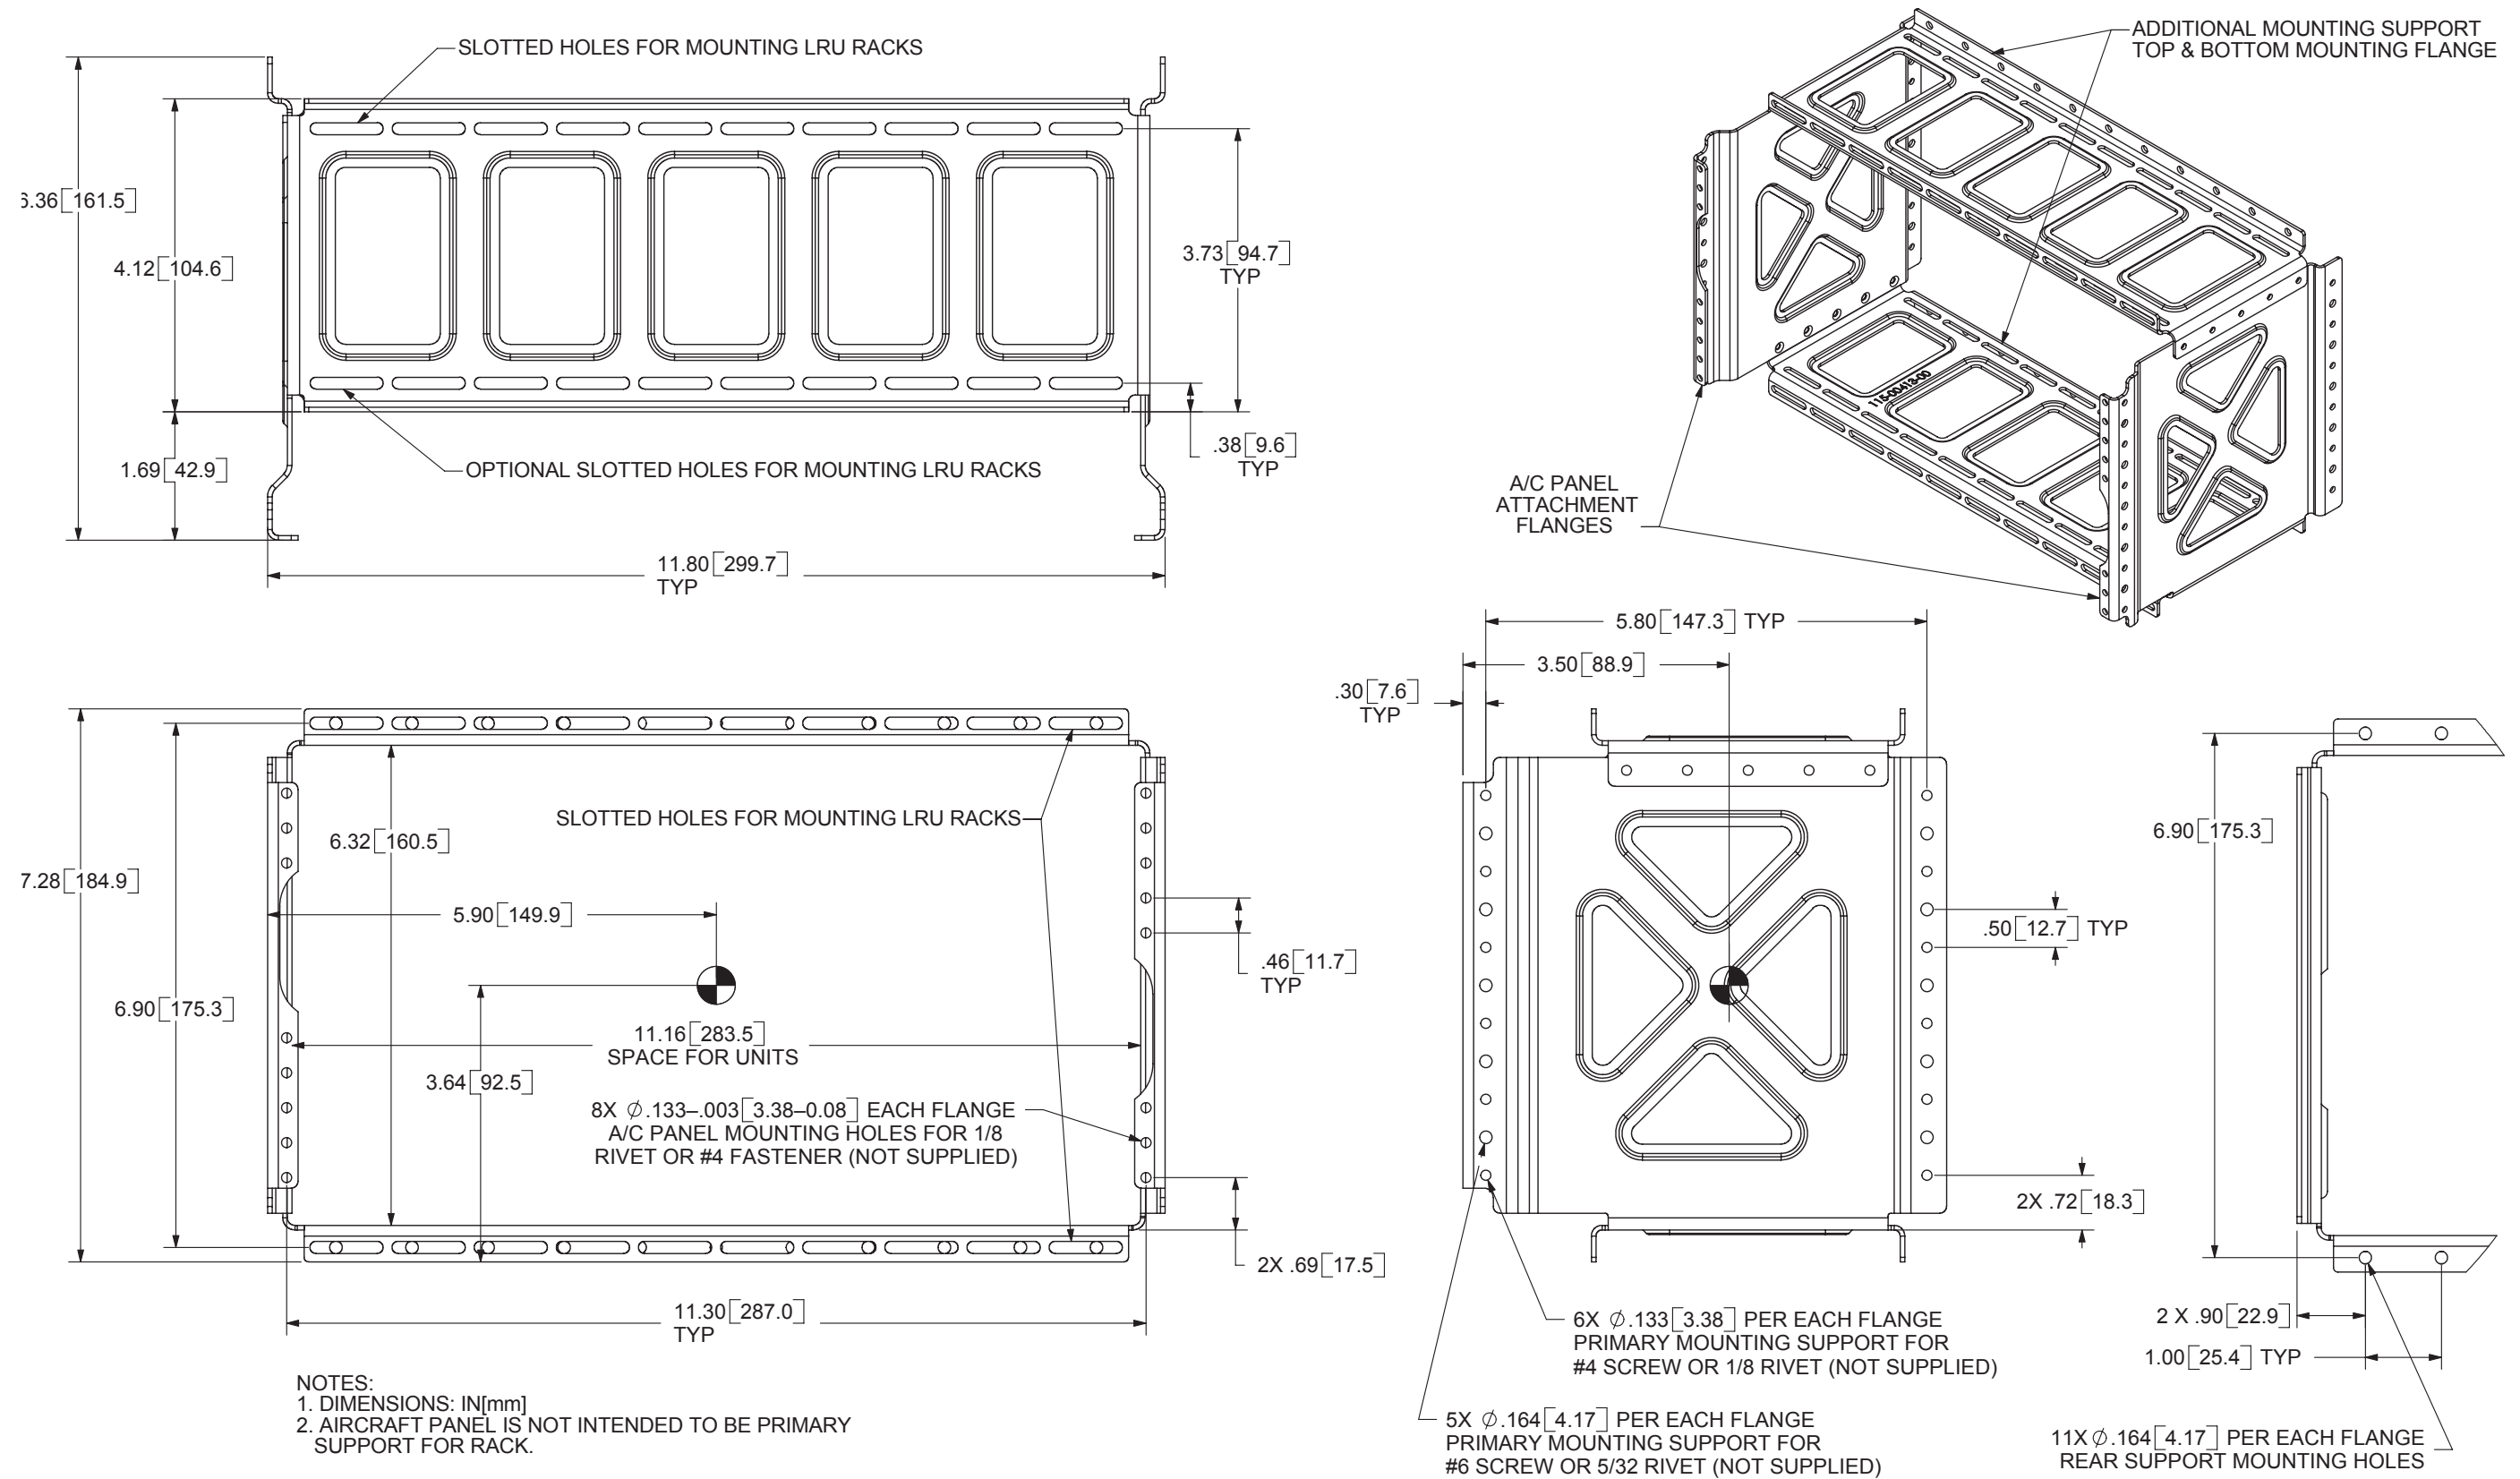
10 Inch Main System Rack (Garmin P/N 115-00413-00) Drawing
